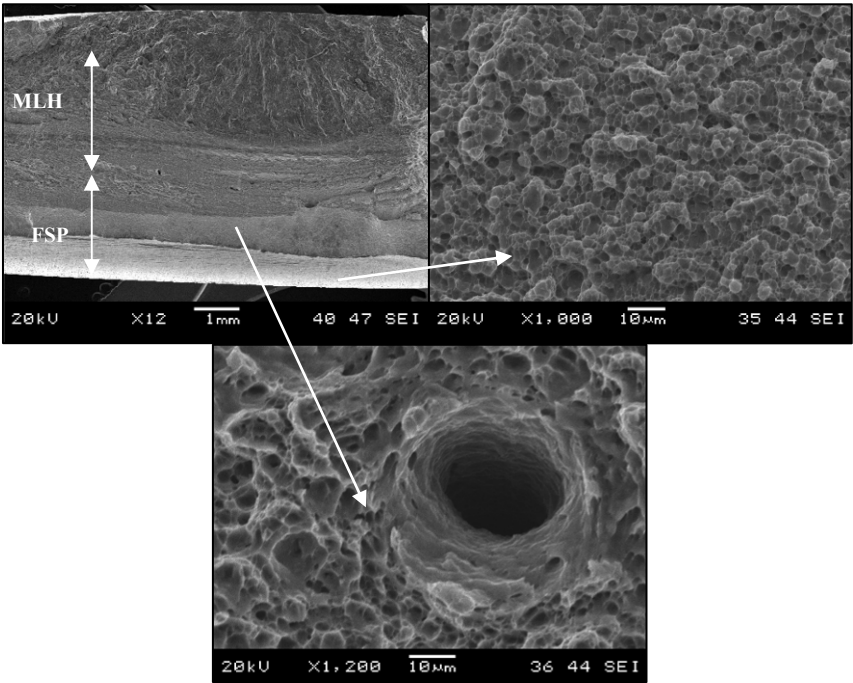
Fracture surface appearance in fatigue zone of FSP samples.
